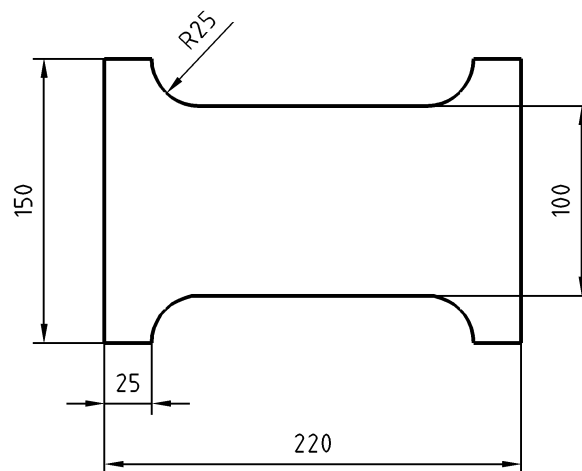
Form and dimensions of the test piece for the test to determine tensile strain at break
